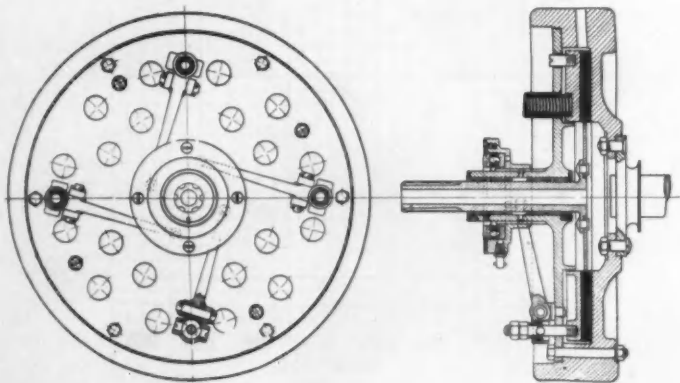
SECTION THROUGH THE CLUTCH USED ON THE TYPES-J AND L BUSES
